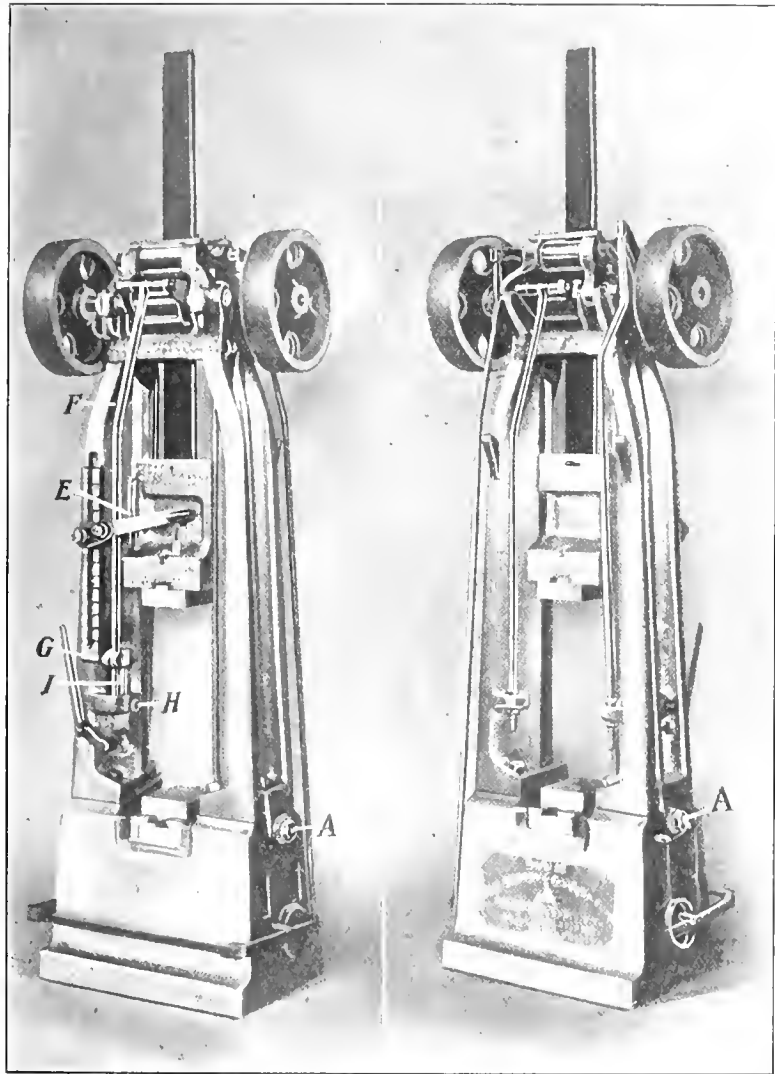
Front and Rear Views of Board Drop-hammer of Rigld Design
